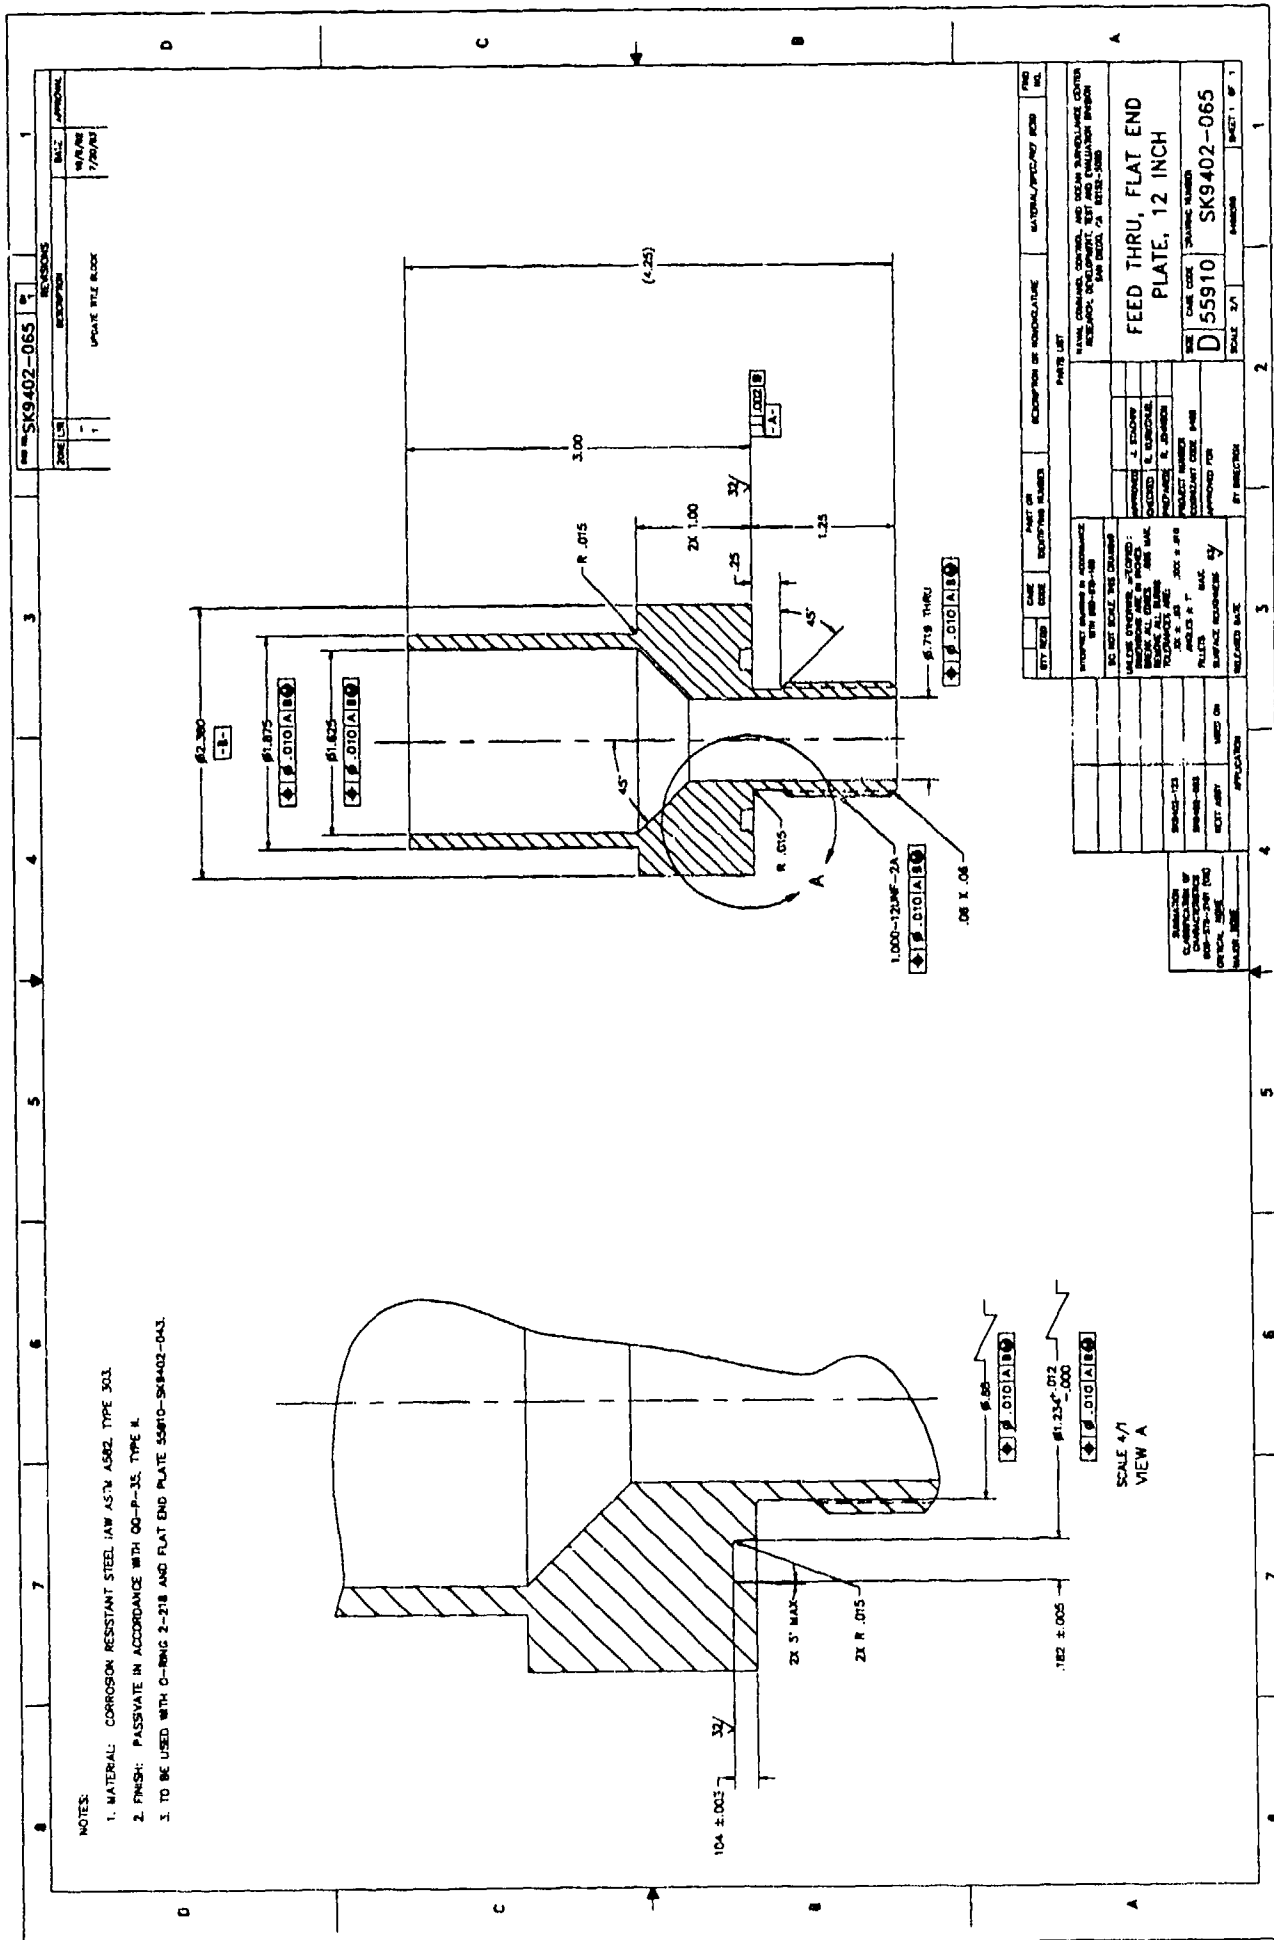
12-inch cylinder test assembly III configuration, Sheet 2.
